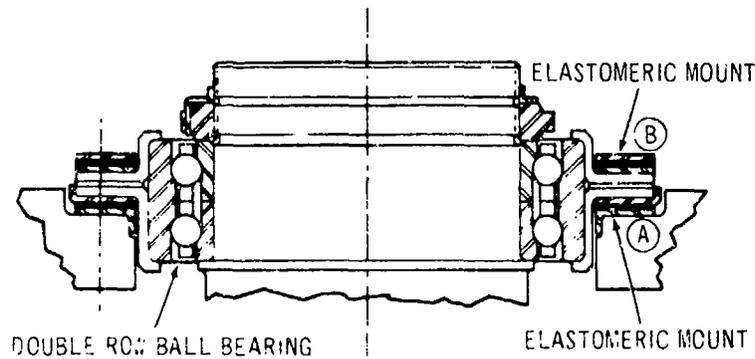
Double Row Bearing Mounted With Resilient Laminate
